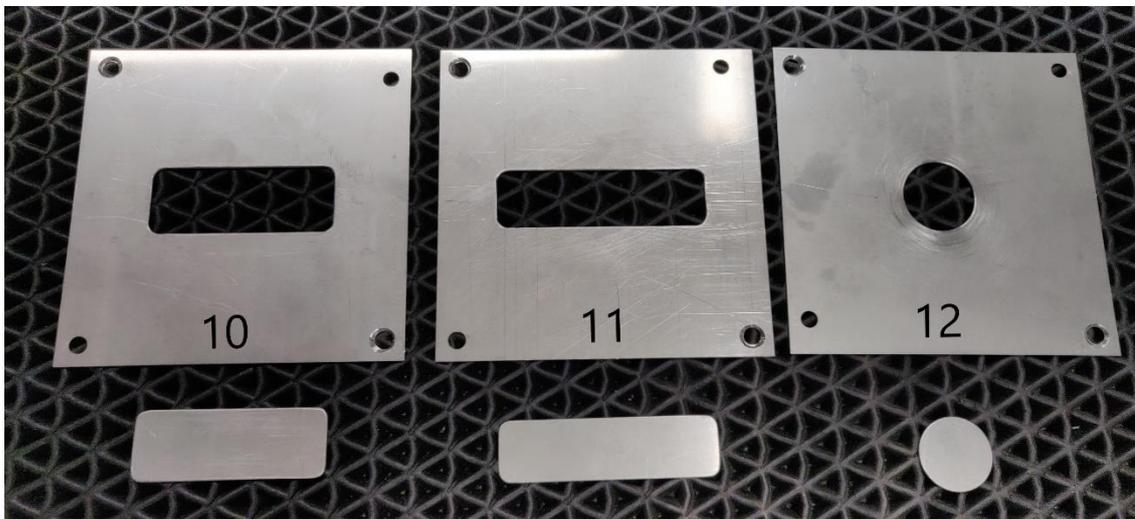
Sheet metal tools for debossed guards (toolsets 10–12).
